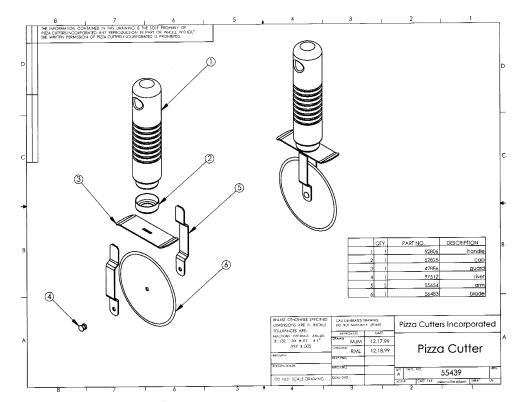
Assembly drawing of pizza cutter (from [2])
